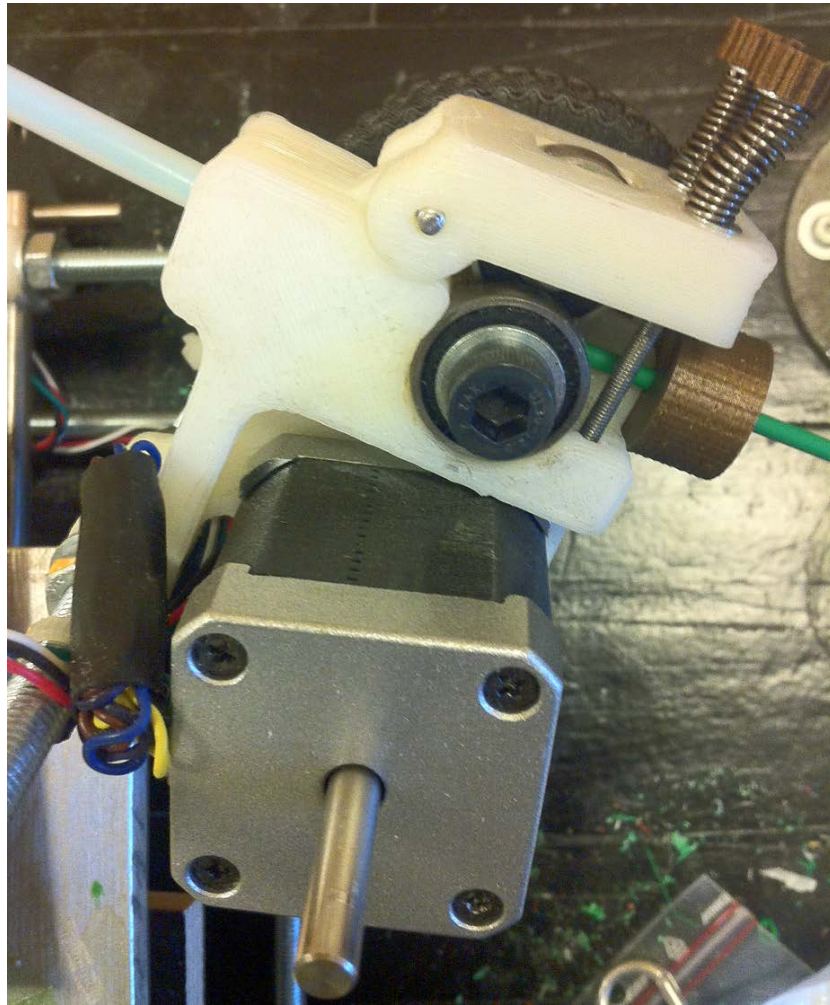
Filament Drive Mechanism: A filament wire (green) is driven by a drive-axle (Allen Headed) with a diagonally hobbled toothing (not visible). An idler bearing hinged, and spring-loaded apply a retaining-force to the filament. The filament is run through a dust-removal cup holding a sponge-filter (gold colored) before entering the mechanism.
